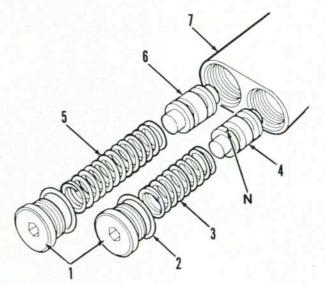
A-Low pressure regulating valve used on TW-5, TW-15 and TW-25 tractors.
